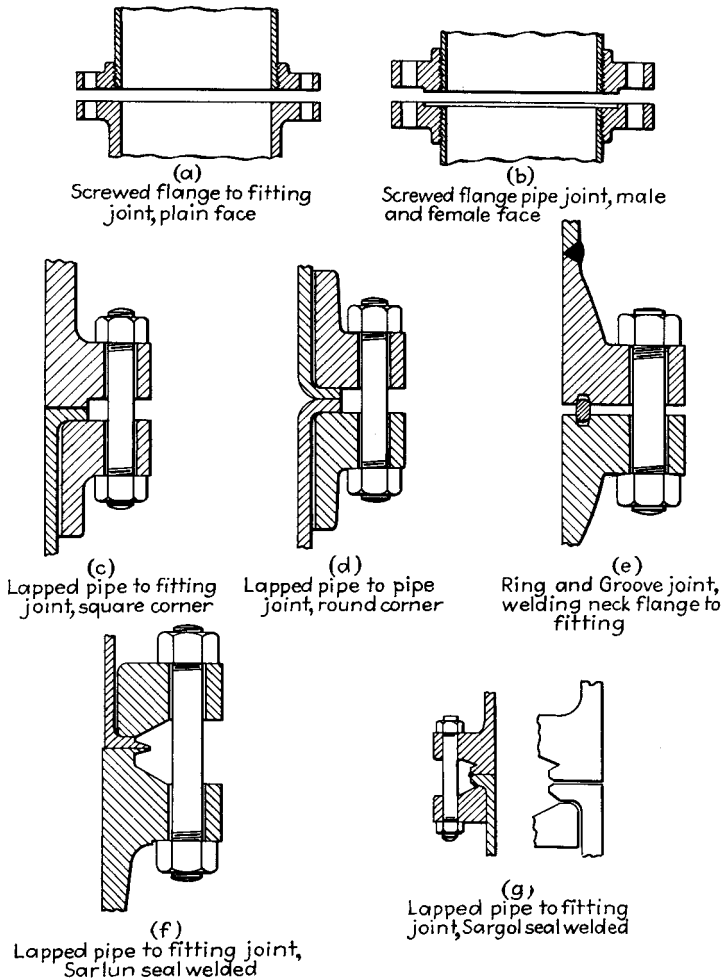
Commonly used flanged joints. (a) Screwed flange to fitting joint, plain face; (b) screwed flange pipe joint, male-and-female face; (c) lapped pipe to fitting joint, square corner; (d) lapped pipe to pipe joint, round corner; (e) ring and groove joint, welding neck flange to fitting; (f) lapped pipe to fitting joint, Sarlun seal welded; and (g) lapped pipe to fitting joint, Sargol seal welded.
